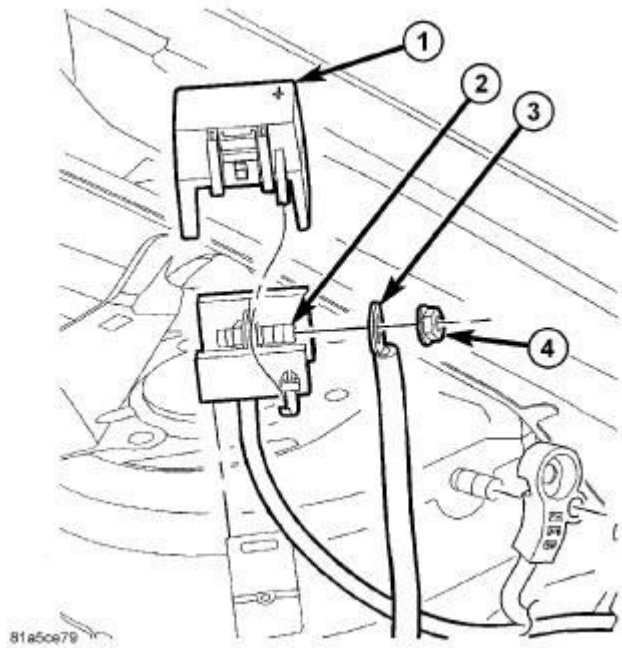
Identifying Positive Cable Retaining Nut & Cable
